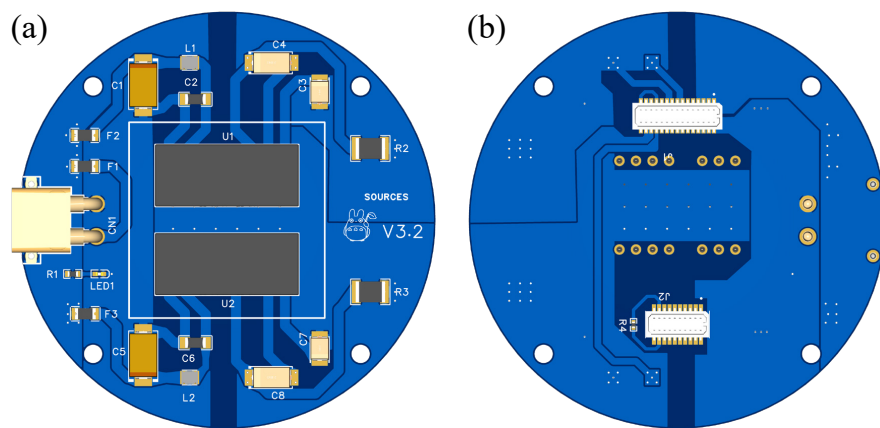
Structure of the power board: (a) Top view; (b) Bottom view.
